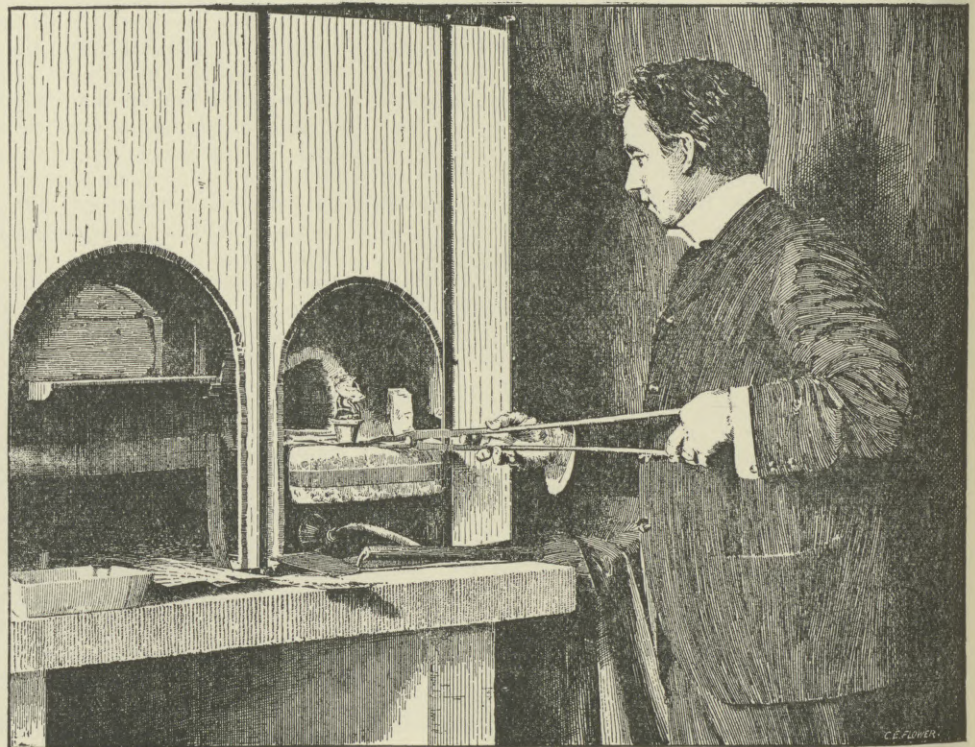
Placing an object covered with pulverized enamel into a muffle.
